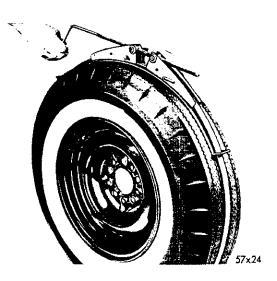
Expanding Tire Beads (Mechanical Tool)
